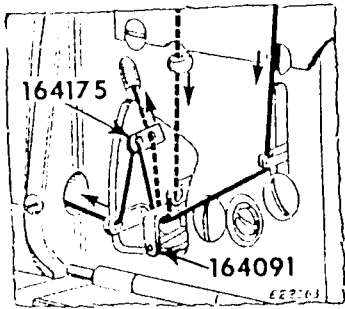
Threading Looper Take-up (Three-Thread Tight Stitch)
